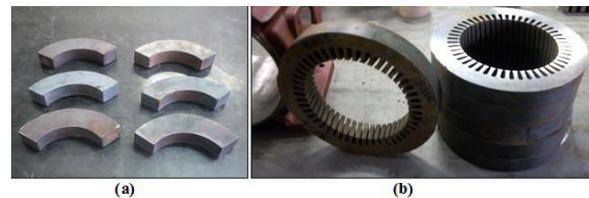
Machine stator (a) parts compacted and sintered, (b) parts machined with grooves.
